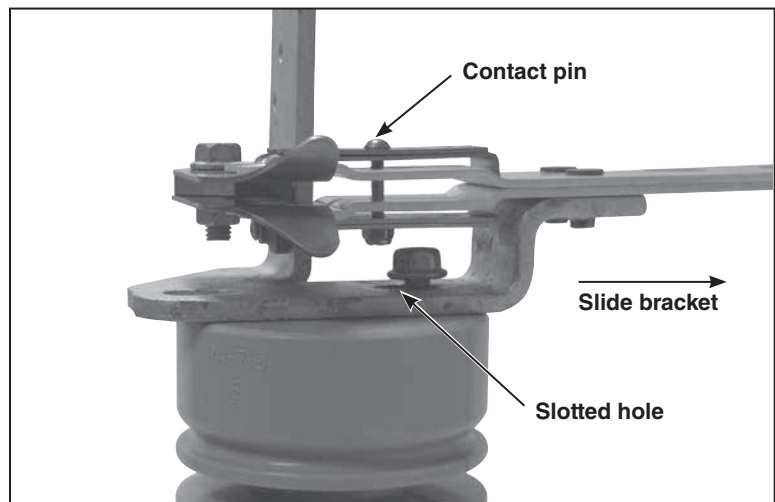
Slide the bracket until both holes align with the threaded hole on the insulator.
